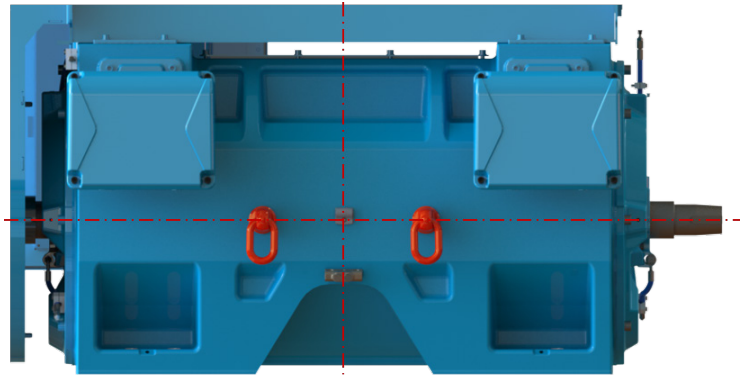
Detail of the position for mounting the device of the WEG Motor Scan system on W60 motors
